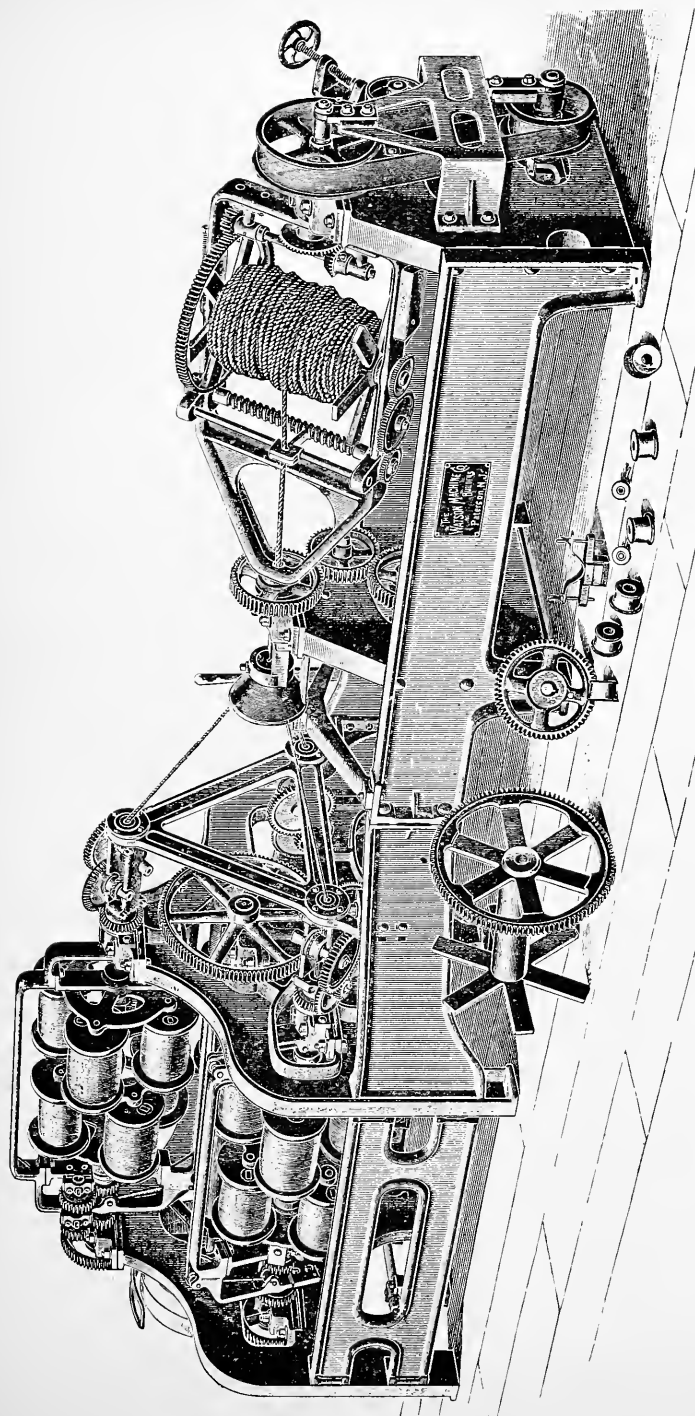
Twenty-four-thread compound rope machine to form and lay ropes in one operation.
